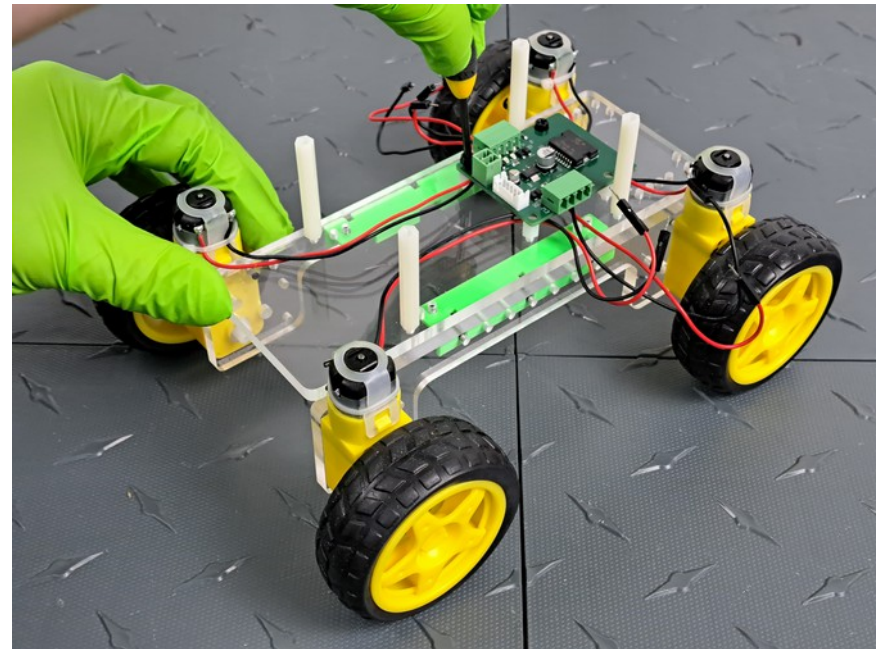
Remove terminal plugs and install Motor Driver PCB
